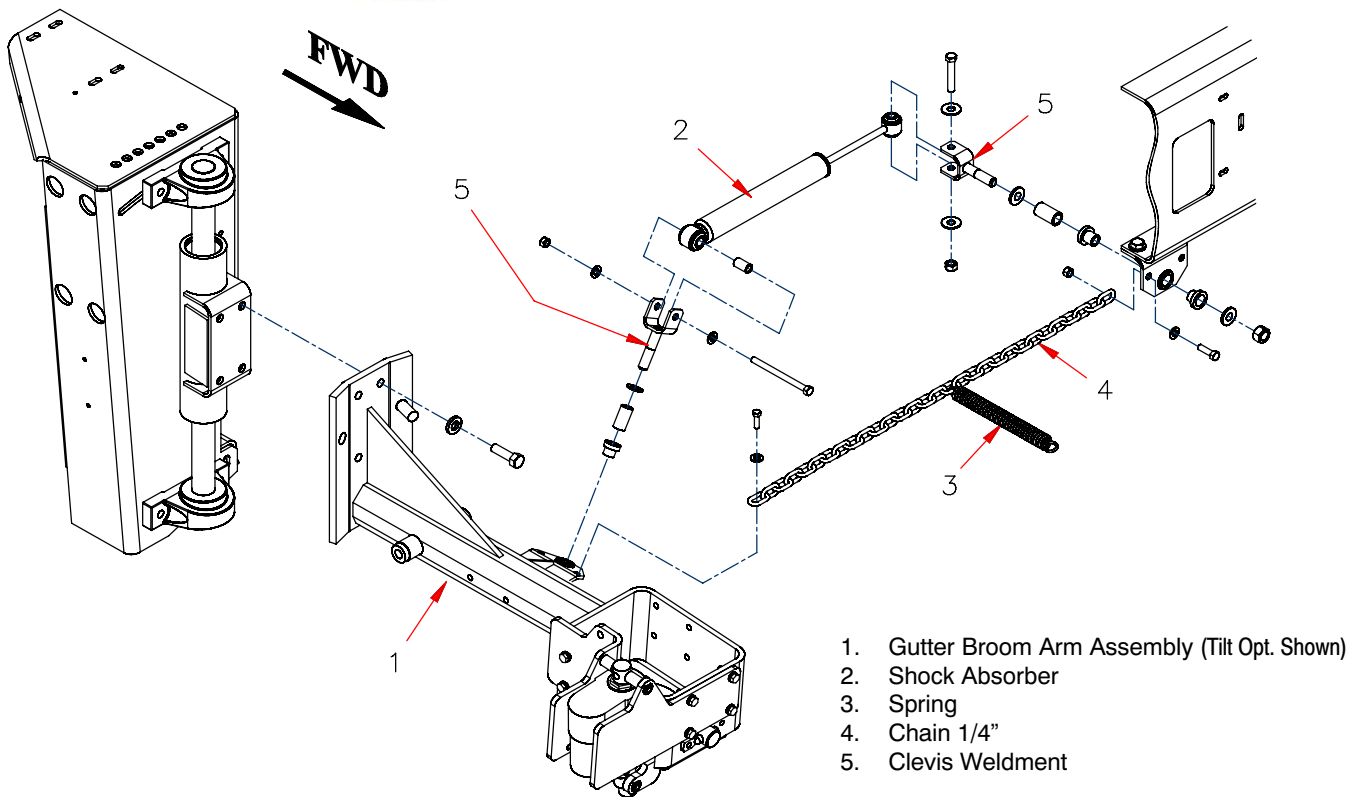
A The gutter broom arm shock absorber mounts to the gutter broom arm and to the frame. A jack may be required when working on the gutter broom arm assembly to relieve the hydraulic cylinder tension.
